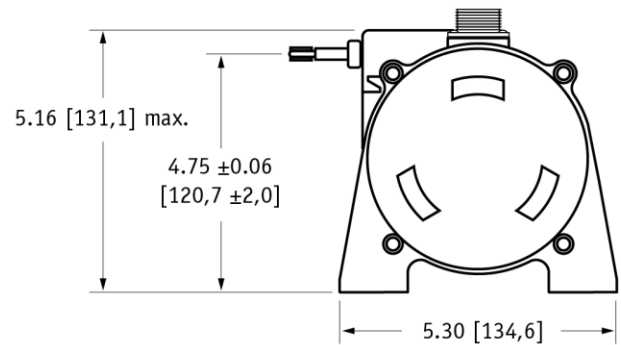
Outline Drawing (18 oz. cable tension only)
